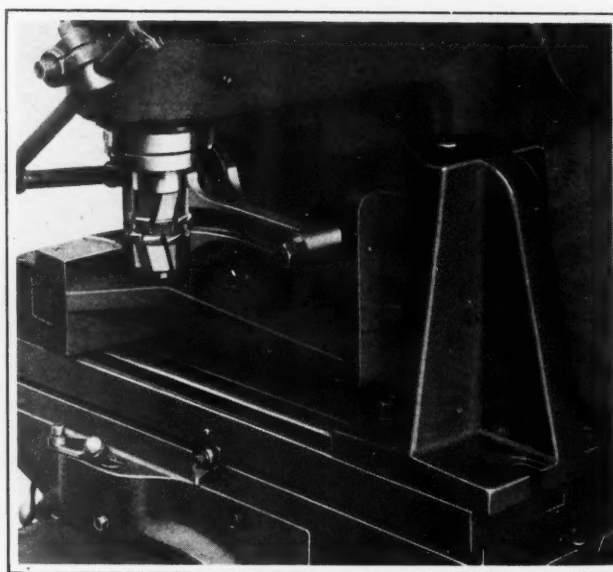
A Hinged Type of Fixture for Milling Top Edges of Channel and Rounding Corners
